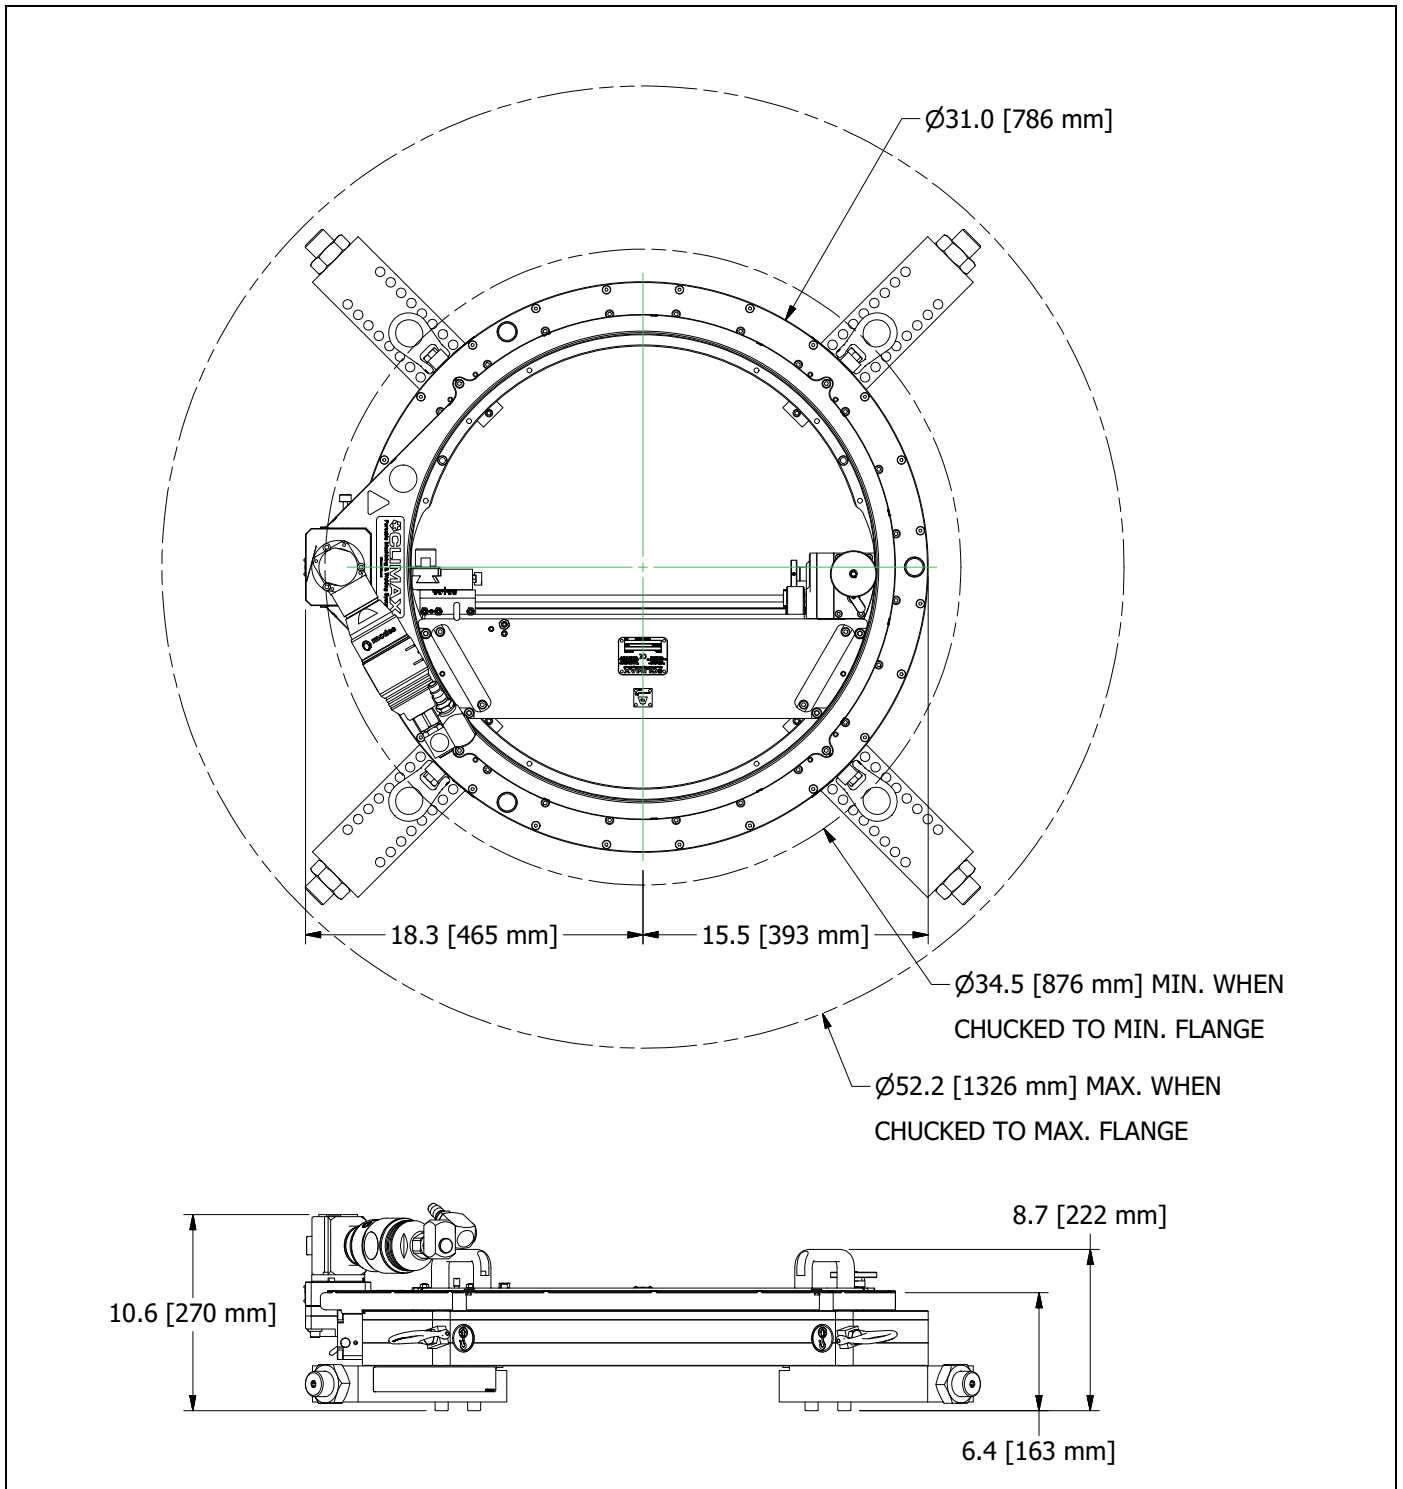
FF3600 RIGHT-ANGLE PNEUMATIC MOTOR MACHINE DIMENSIONS
